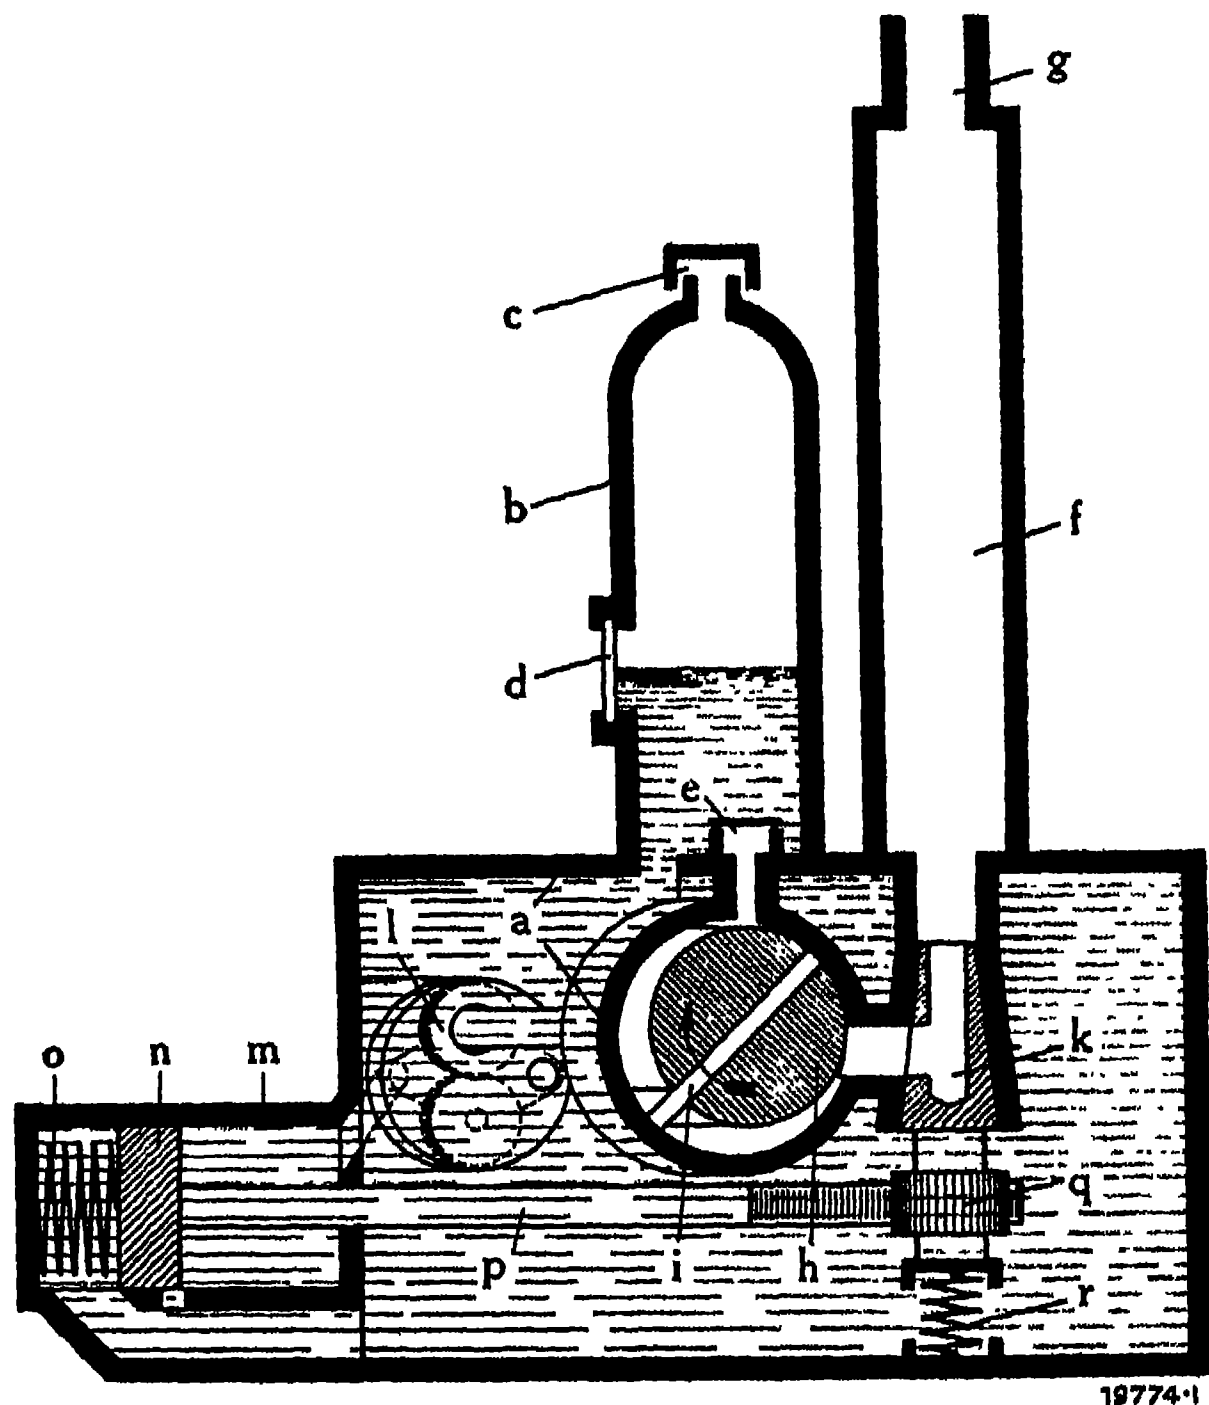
Diagrammatic View of Preliminary Vacuum Pump with Combined Oil-pressure Governor Gear Type. (a) Pump casing. (b) Exhaust dome. (c) Exhaust chimney. (d) Gauge glass. (e) Non-return valve. (f) Oil trap. (g) Preliminary vacuum pipe line. (h) Rotor. (i) Plate. (k) Rotary valve. (l) Geared oil pump. (m) Governing cylinder. (n) Piston. (o) Return spring. (p) Rack. (q) Pinion. (r) Compensating spring.
